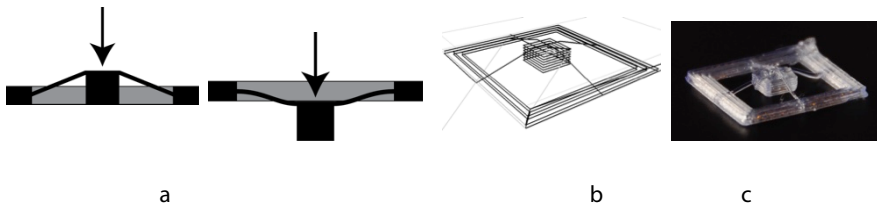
a) Section view of clicking behavior b) Visualization of tool paths c) Fabricated button.
